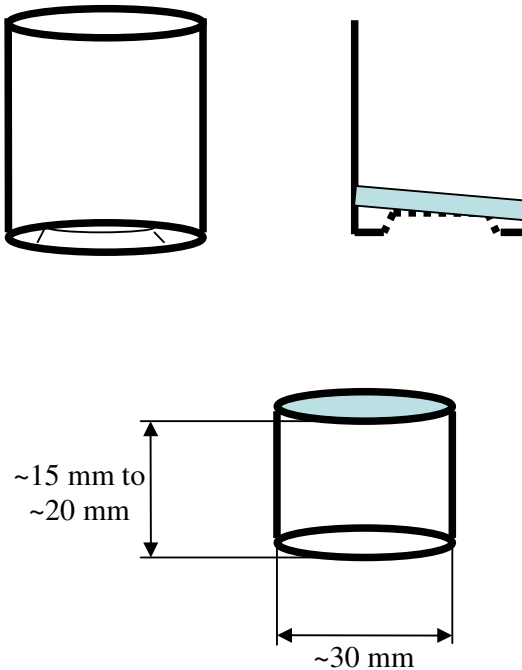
A schematic of the original mould and the test piece that it produced.
